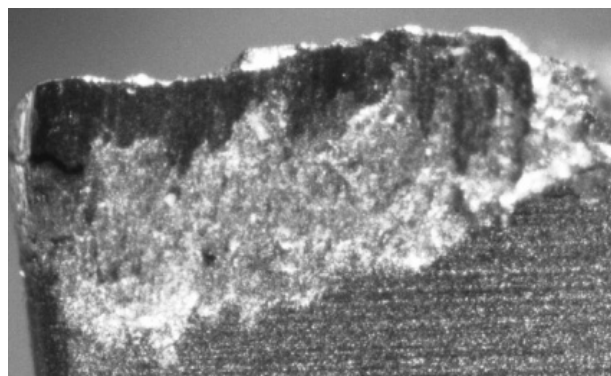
Up edge (built-up) on the tool after machining (without Sb and HT)
